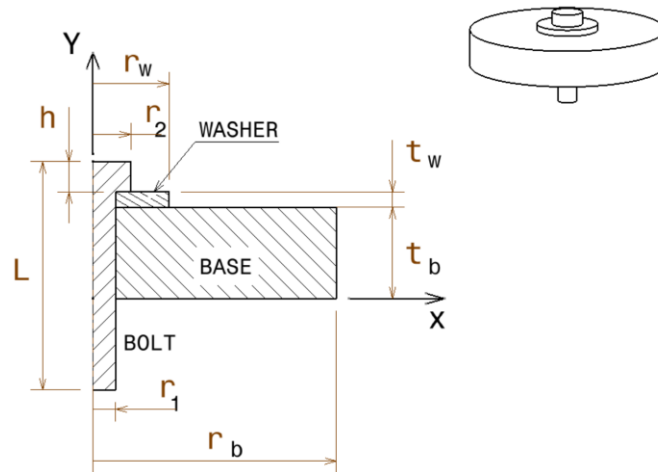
Sectional view of a bolt joint assembly consisting of a bolt, a washer and a base seen in inset.
